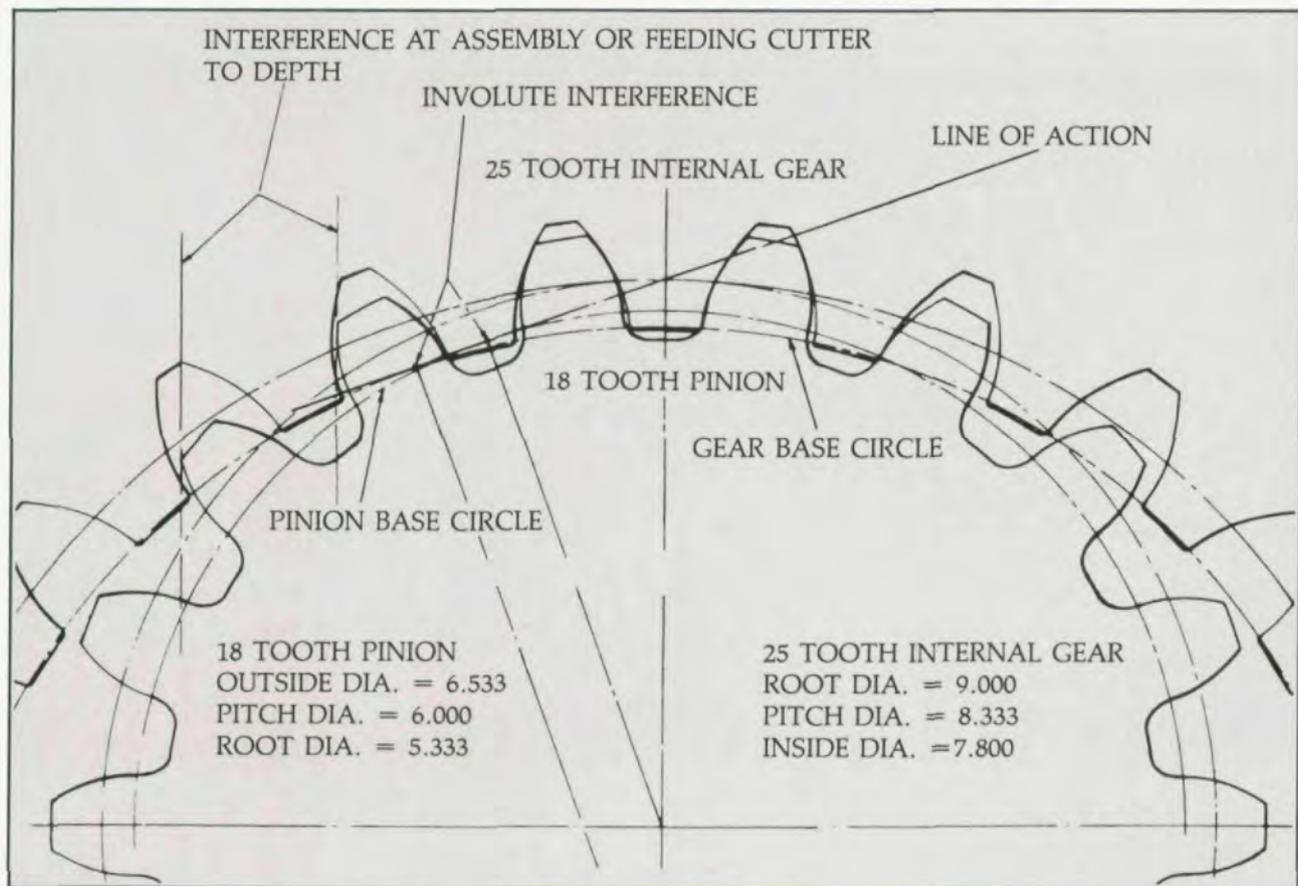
DP-20° Stub Tooth Form - Conventional Design
